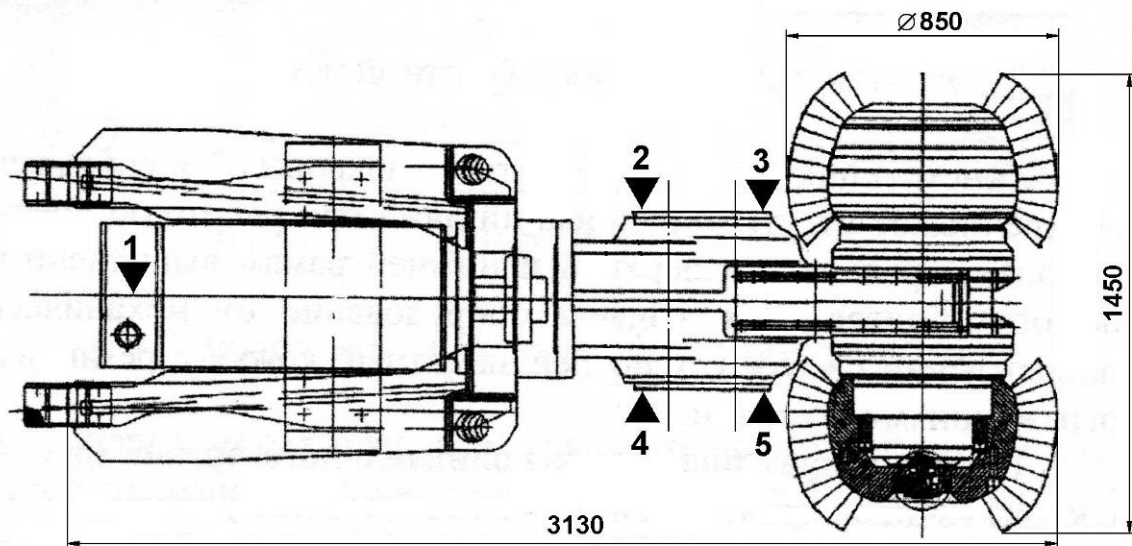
The Control Points for Vibration Measurements on Cutting Section of the Header SM-130
